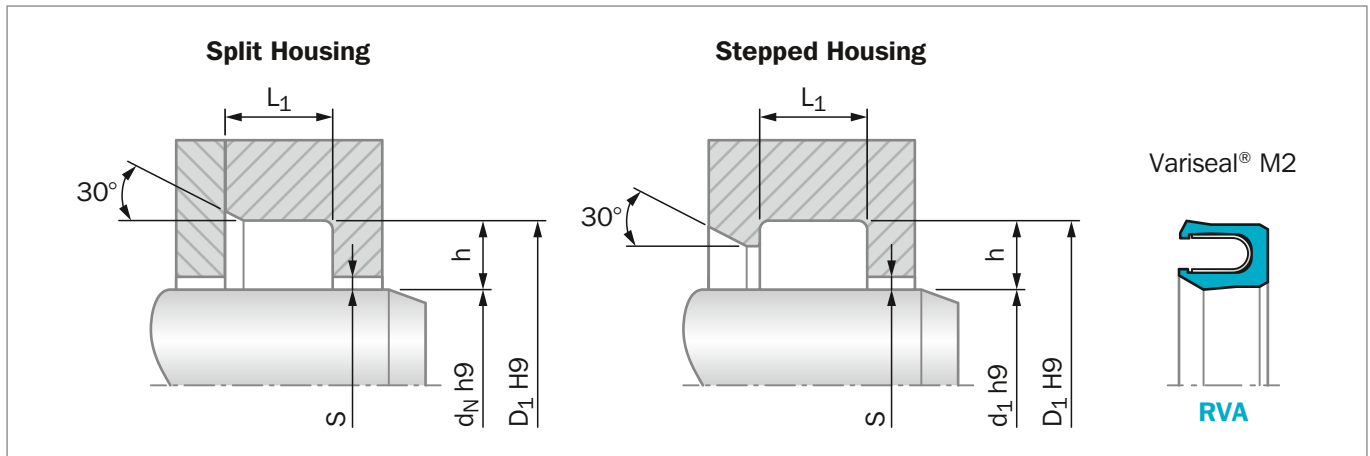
Installation Drawing (see Figure 77 for additional groove details)
